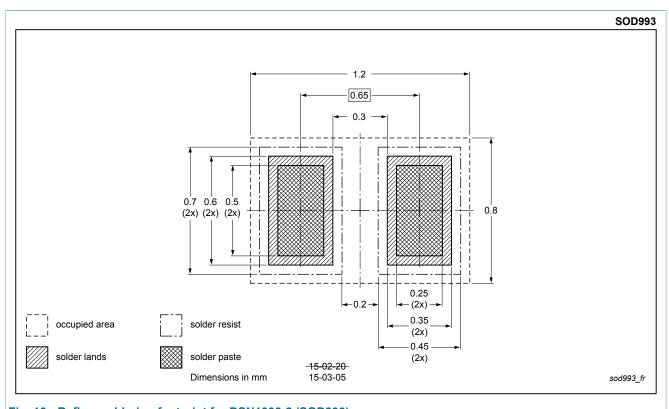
Reflow soldering footprint for DSN1006-2 (SOD993)
